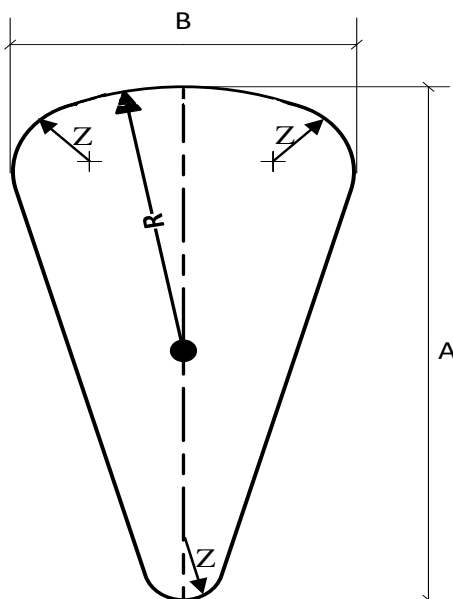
TRAPEZOIDAL SECTION OF STANDARD CRANE HOOK
